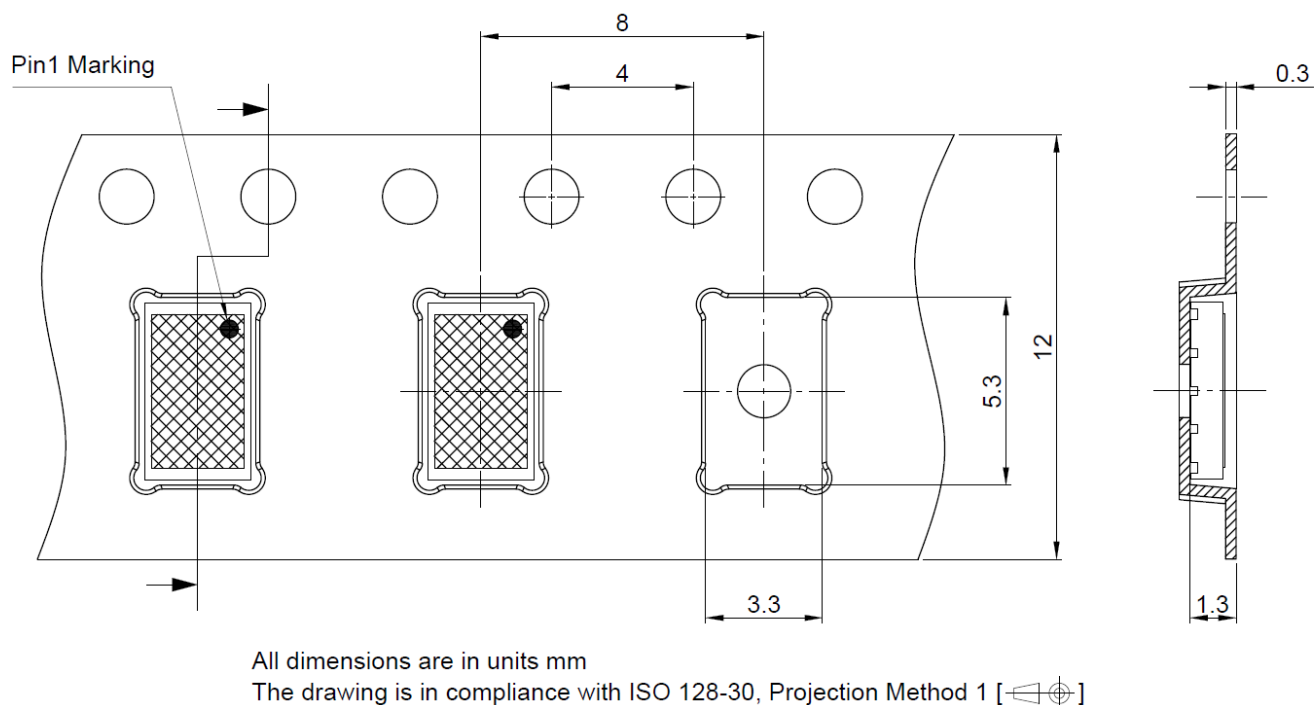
Packaging variant PG- TSON- 6 , dimensions in mm
